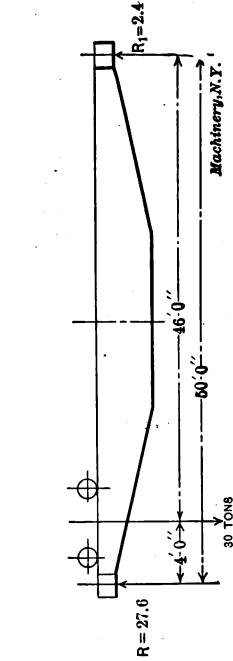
Arrangement of End Carriages of Crane shown in Outline in Fig. 28
